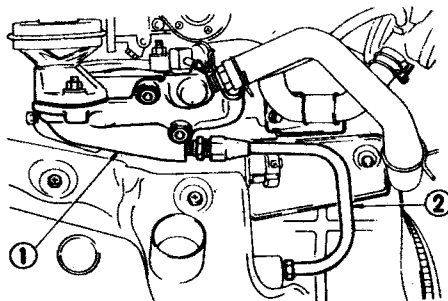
EGR tube and passage removal - 1976 model shown
